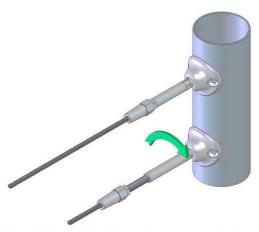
Figure E. Tension by holding the threaded stud in a fixed position with a 3/8" wrench while rotating the tensioner body using a 5/16" wrench.
